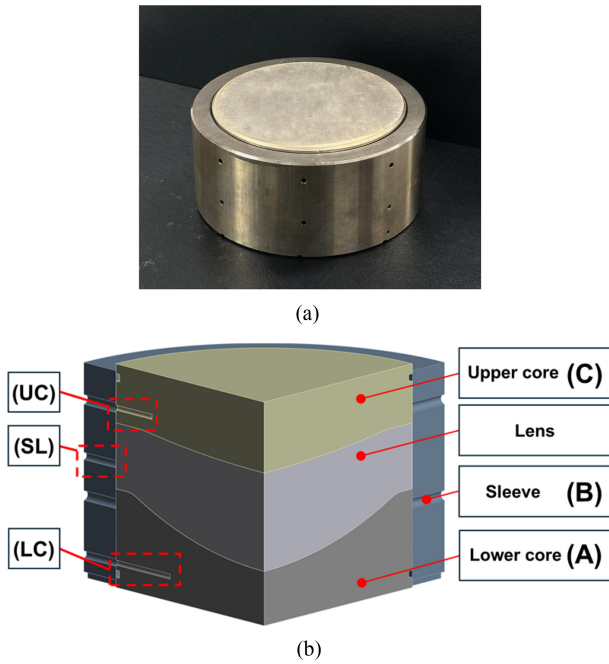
Photograph and sectional view of the molds: (a) Photograph of molds and (b) Sectional view of molds
